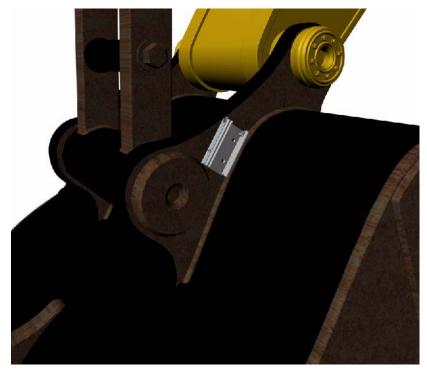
Quick Coupler/Bucket Bracket Location - Outside
